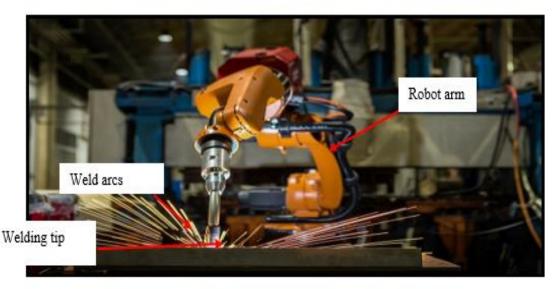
An instance of robotic welding (ATI, 2021)
